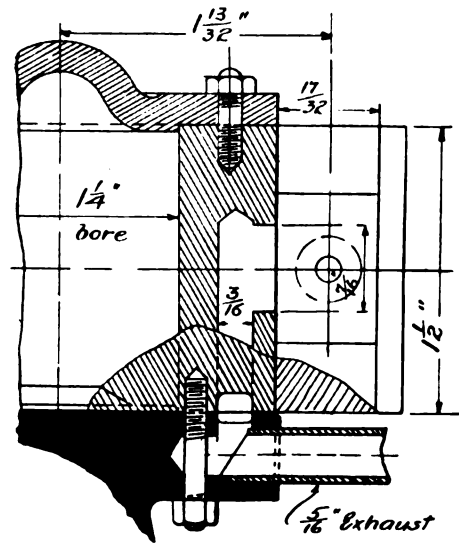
SECTION THROUGH EXHAUST PORT AND THROUGH PIPE.
